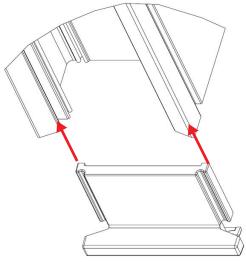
INSERTING THE MODULE INTO THE HPX-1600 CHASSIS
